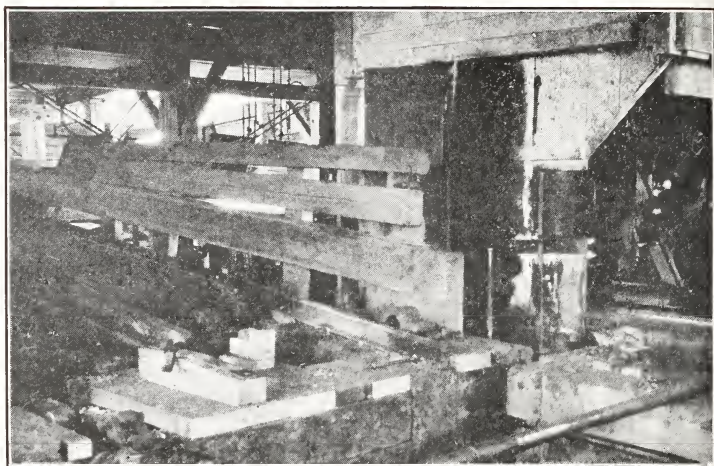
Timber barricade at end of log deck to prevent logs rolling on sawyer.
